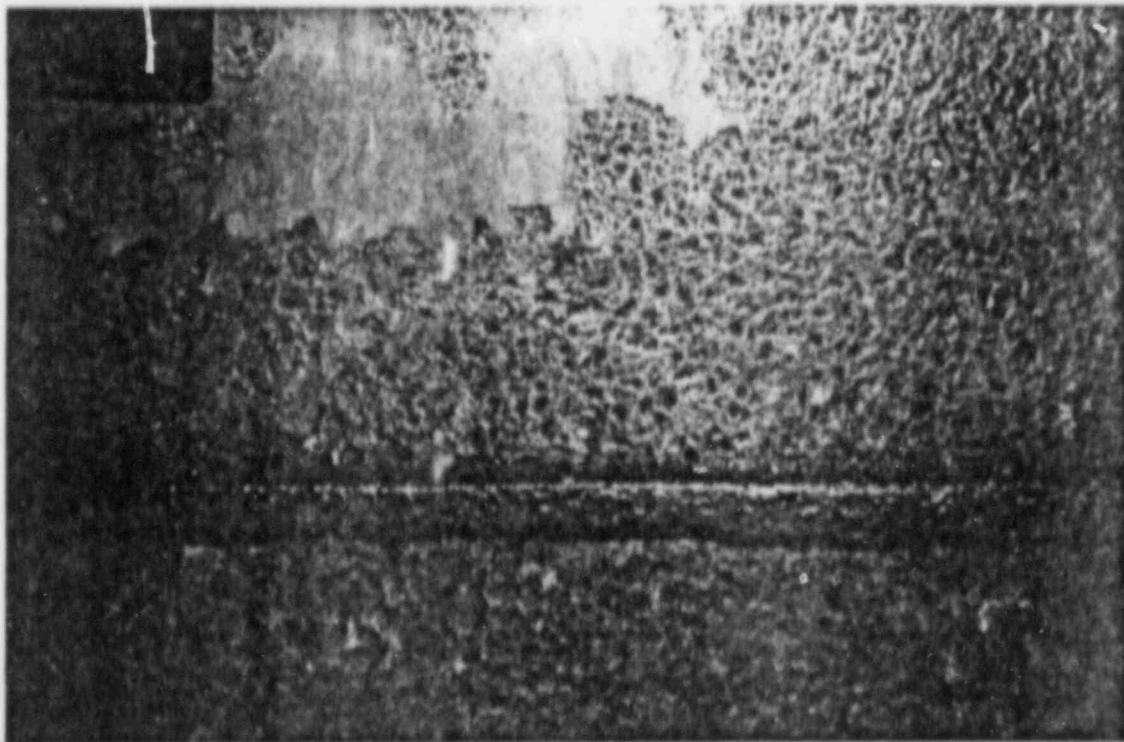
Tank 8D-1 Weldment After Wire Brushing,
